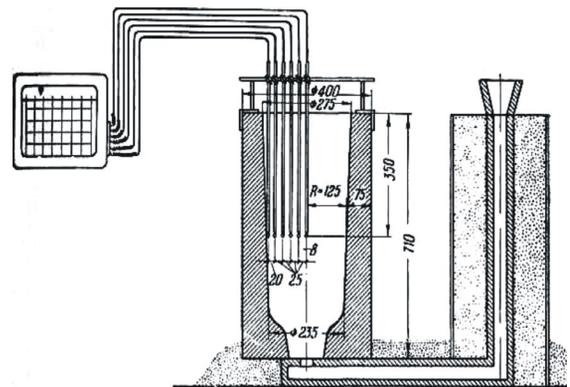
The scheme of the casting mold and the placement of thermocouples in a cylindrical mold [10]
